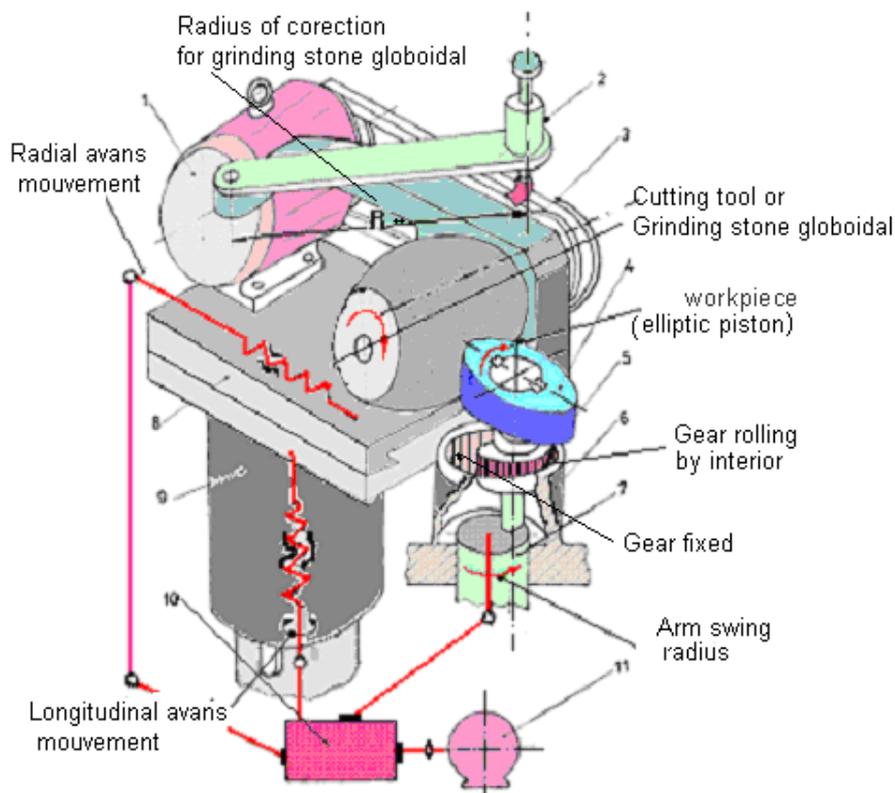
Machine tool machines milling and grinding elliptical piston (Patent no. 77503/1979 - OSIM, Bucharest, Inventor Muresan Nicodim), (kinematic design)
